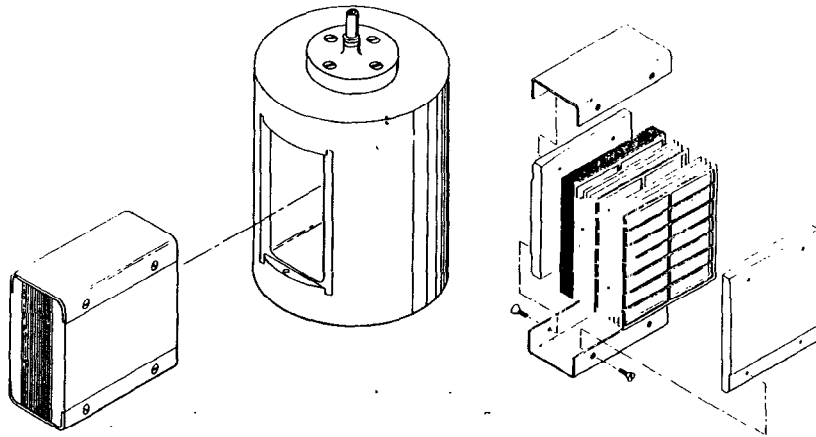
A drawing of the Al shell chopper with the Al shell in the center, a foil package to the left and an exploded view of the foil package to the right.
